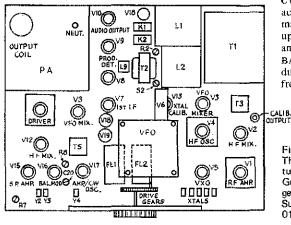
Shielding arrangement on the bottom side of the chassis.
